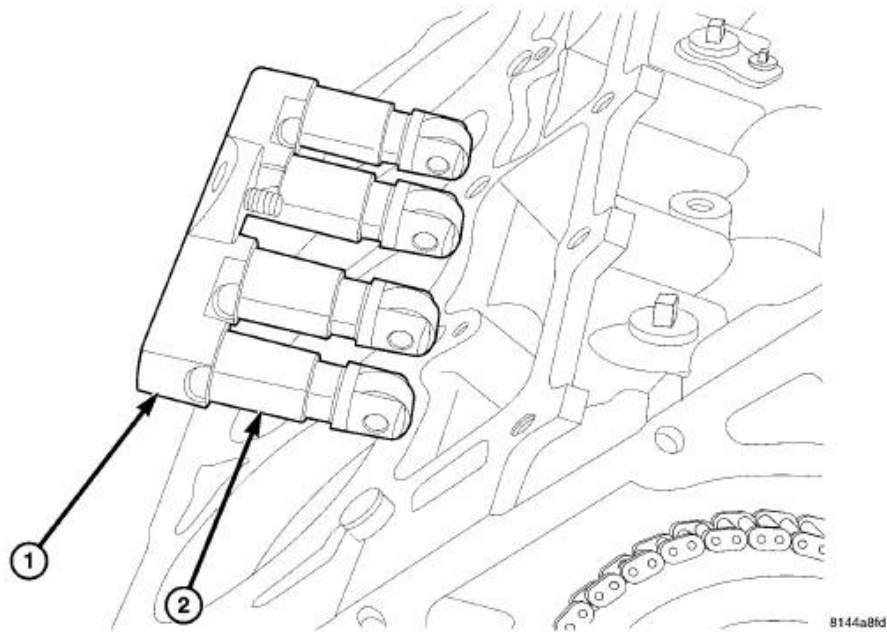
Removing/Installing Hydraulic Roller Tappet
